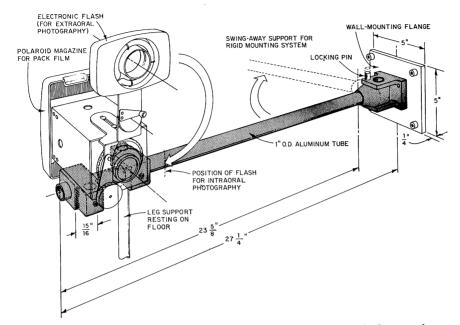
Complete camera system for wall mounted extraoral photography.
